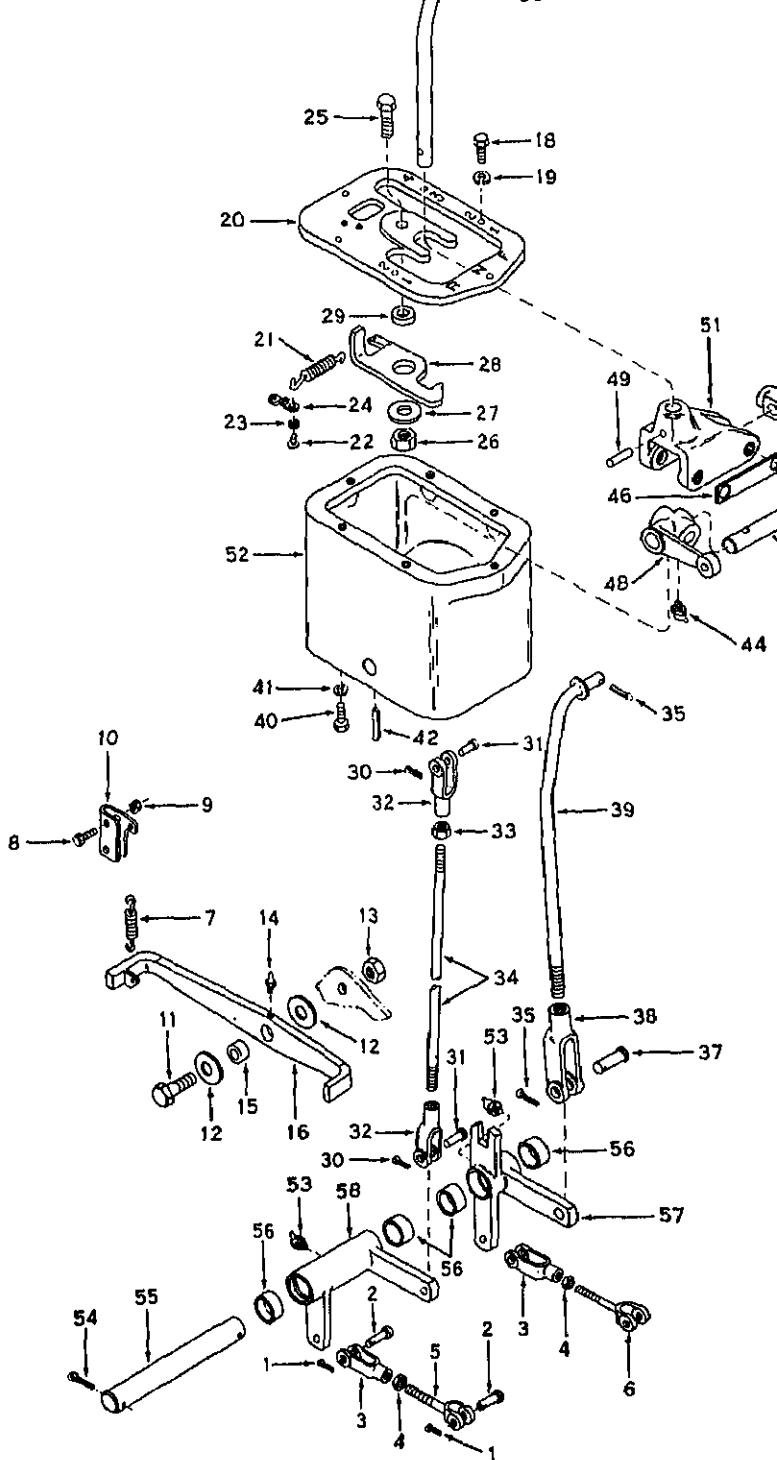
Transmission control levers, removal, disassembly, reassembly and installation (sheet 2 of 2).
